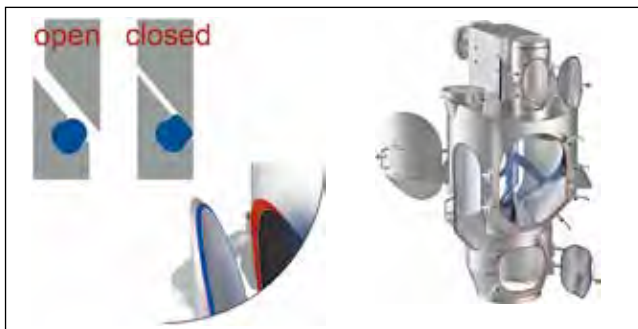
The mixer is equipped with four inspection doors. The doors are cut out with 4000 bar compressed water from the mixing chamber. The cut is made at a constant inclination. In the sloping soffit, the O-ring seals are tight to the product.
